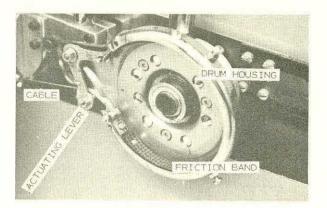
Disassembled mechanical brake showing the friction band, drum housing, actuating lever and cable.
